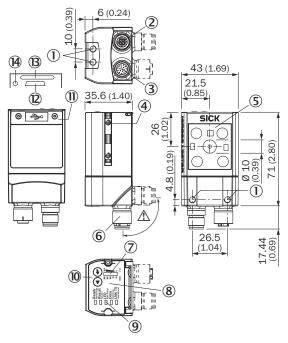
structure and device dimensions, unit: mm (inch), decimal separator: period
